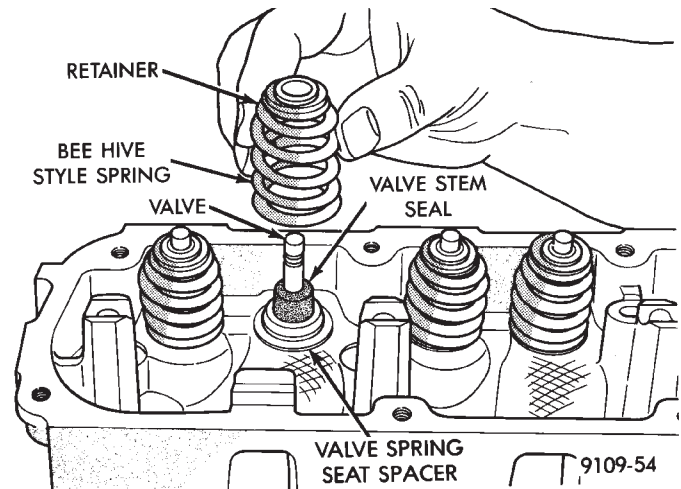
Installing Valve, Cup Seal, Spring and Retainer
